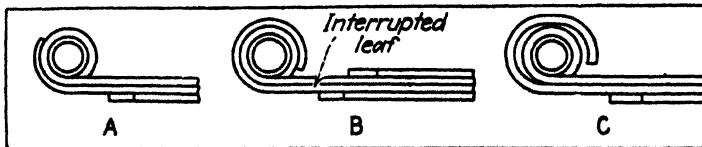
SPECIAL TYPES OF SPRING EYE.
